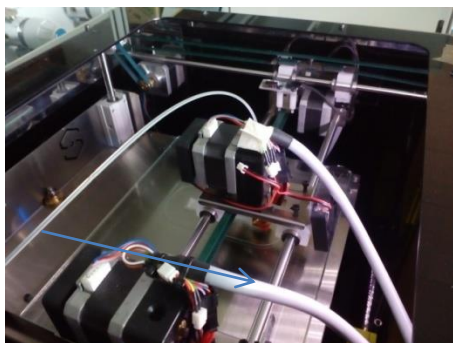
Top view of Sharebot Next Generation Desktop 3D Printer [11].
